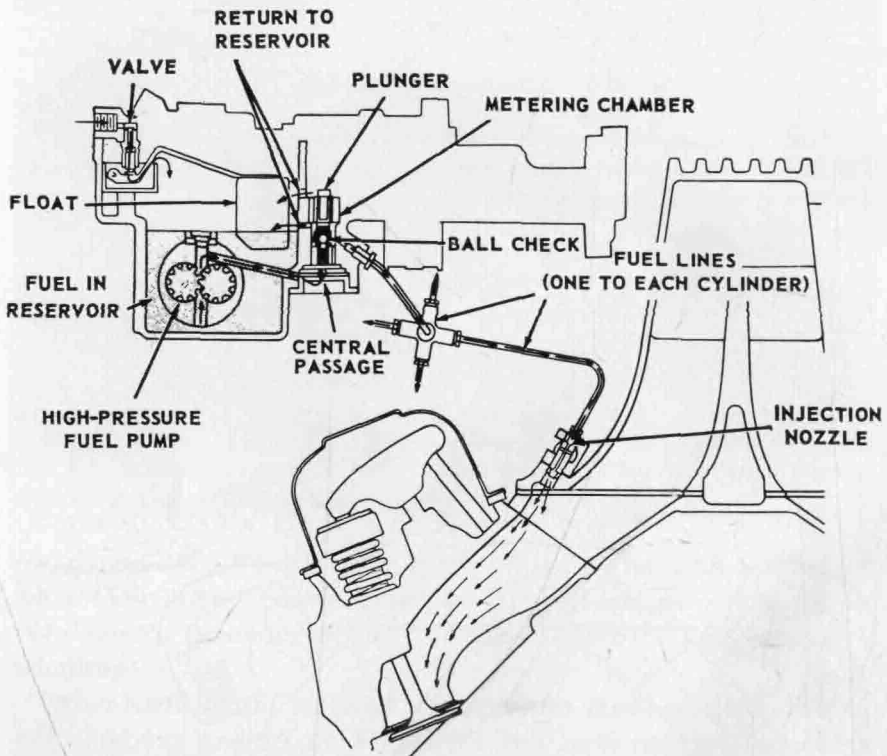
Fuel intake and injection of fuel-injection system. (Chevrolet Motor Division of General Motors Corporation)
